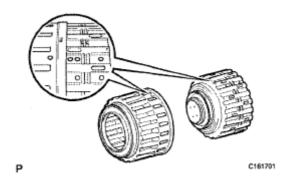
Identifying Holes Of Reverse Clutch Piston And Clutch Drum
